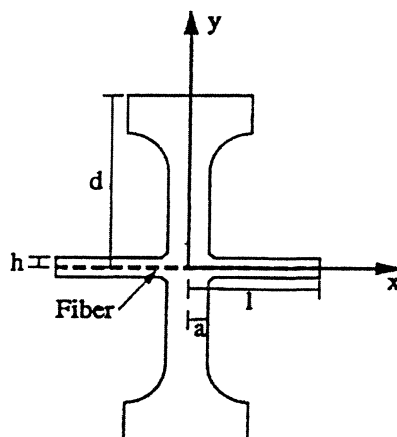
Cruciform tensile specimen for measurement of transverse loading response of single –fiber composite. (After Gundel et al., Ref 82)
